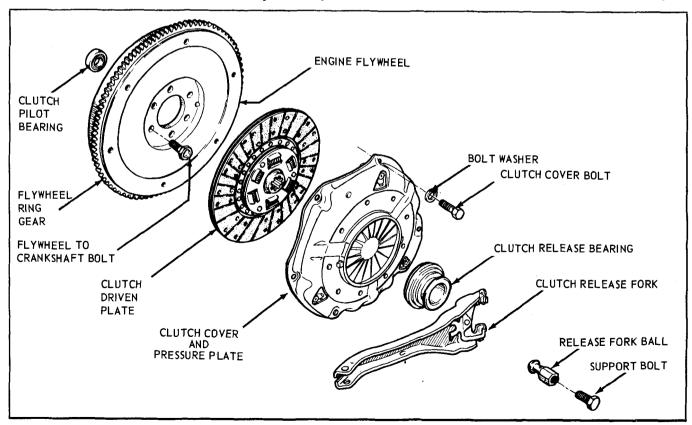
Exploded View of Typical Clutch and Flywheel
